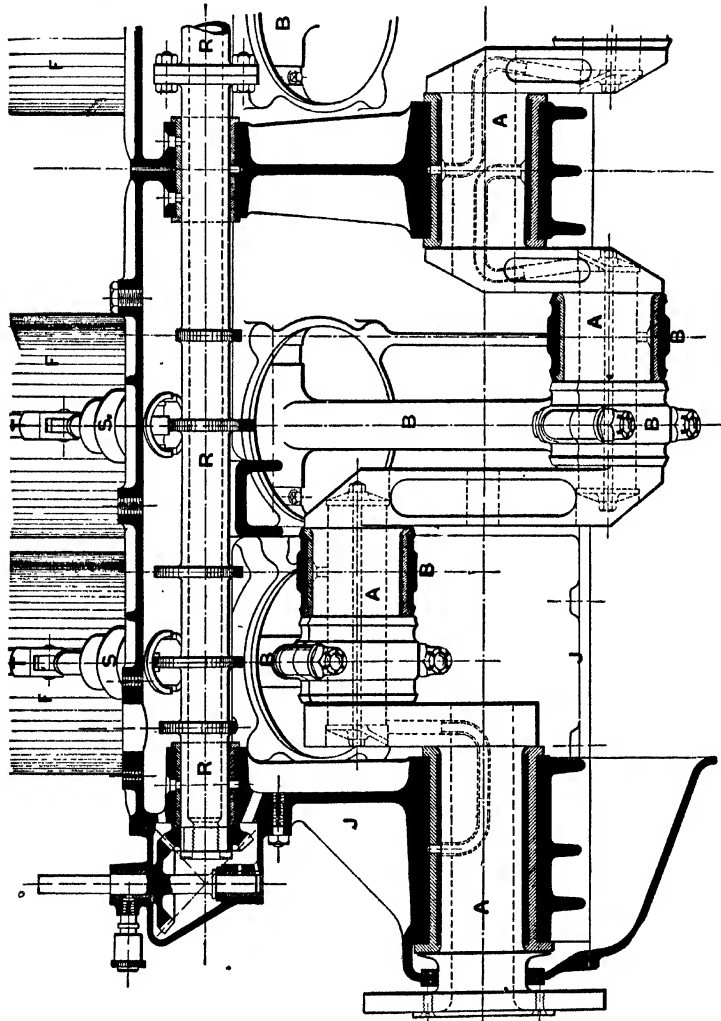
Sectional view showing crankshaft and camshaft of Wolsley engine.
